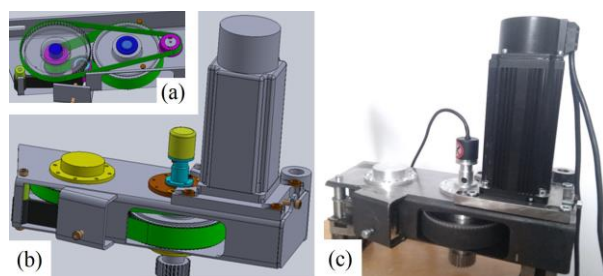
Design layout (a), 3D model (b), and appearance (c) of the proposed gearbox
